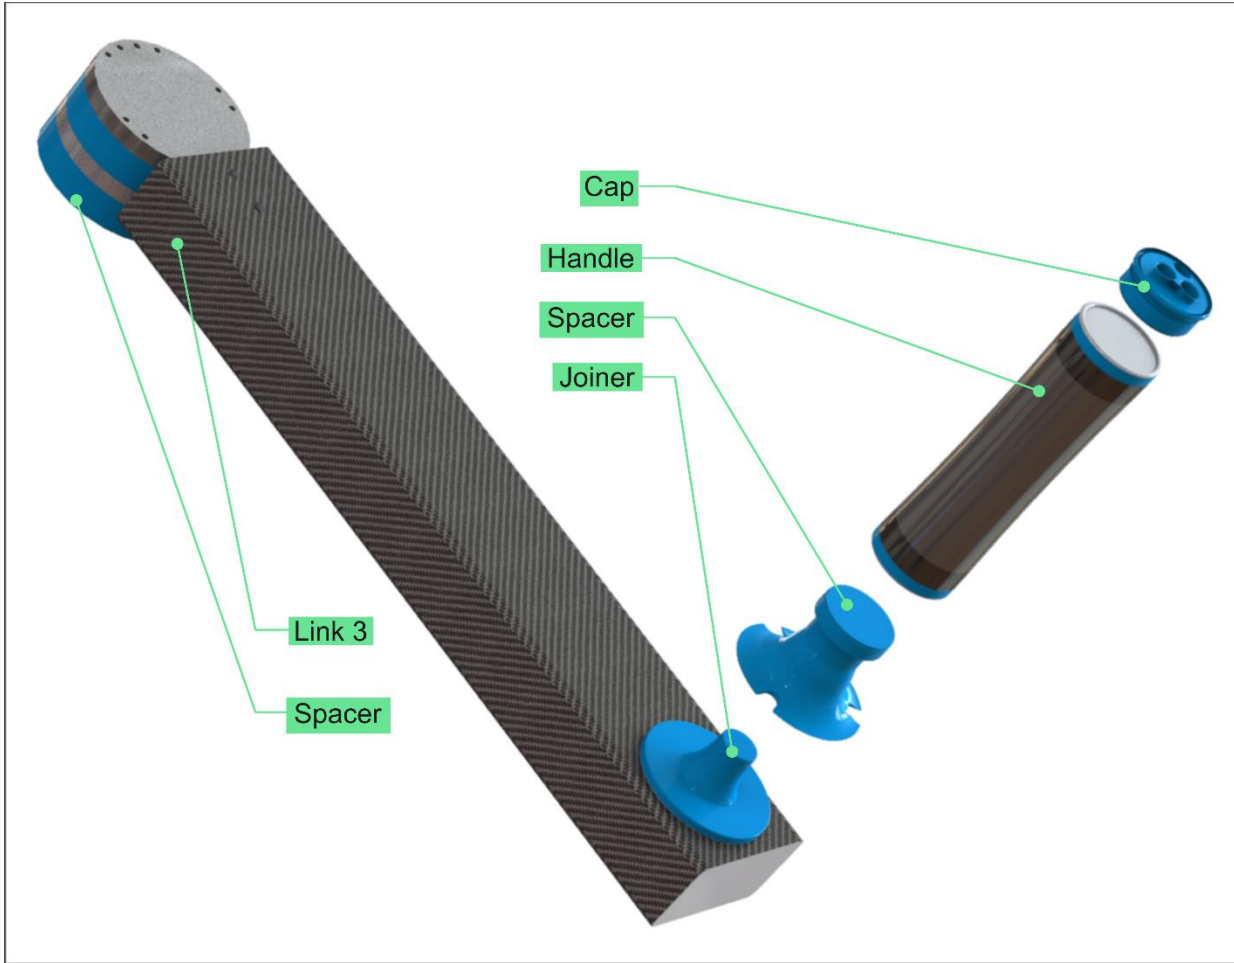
Link 3 assembly exploded view of End-effector (Bottom)
